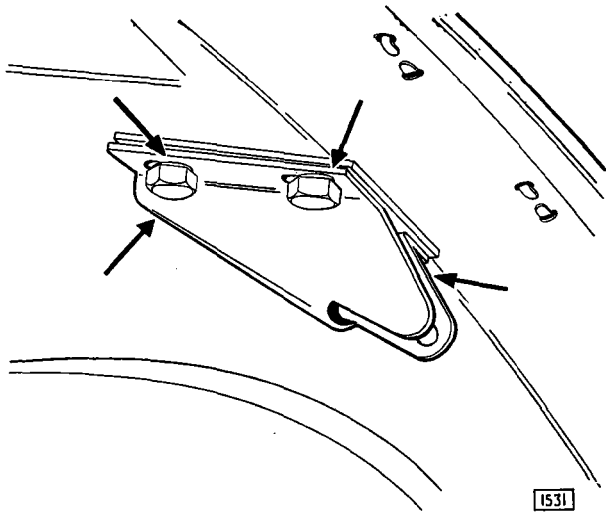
Showing the screws for adjustment of the boot lid striker.
